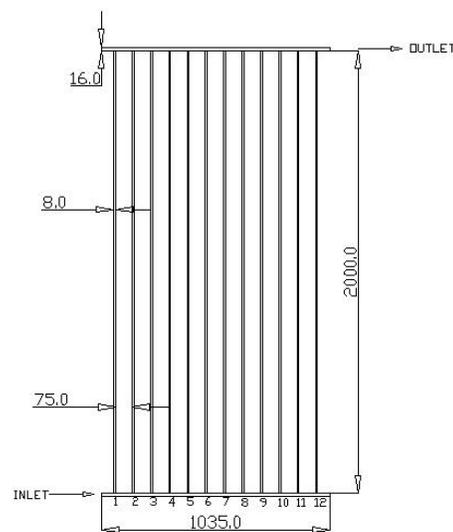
Sectional view of 12 numbers riser tubes flat plate collector.
